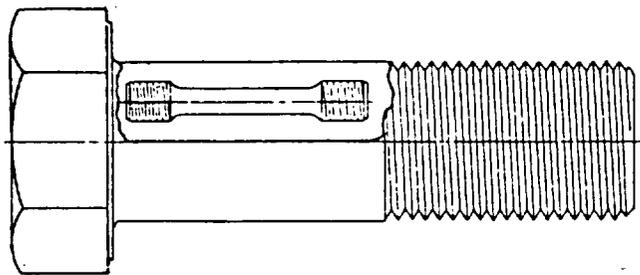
LOCATION OF STANDARD ROUND 2 IN GAGE LENGTH TENSILE TEST SPECIMEN WHEN TURNED FROM LARGE SIZE BOLTS OR SCREWS
